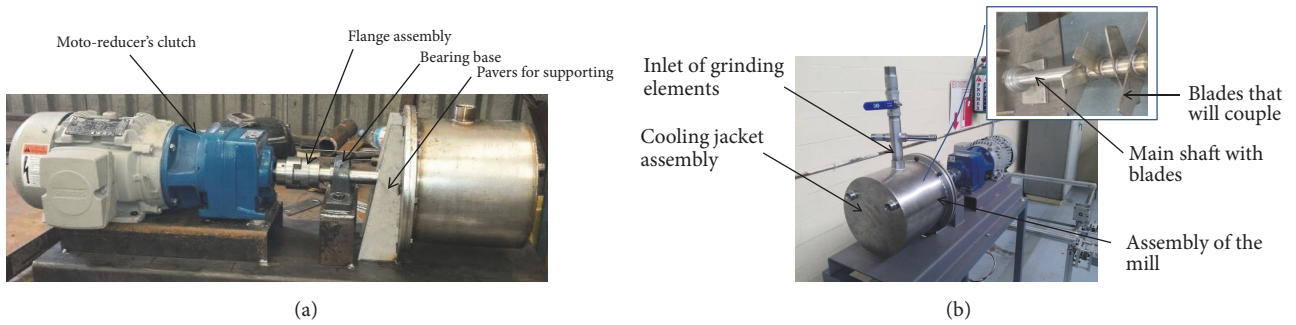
(a) High-energy mill assembly. (b) Final assembly.
